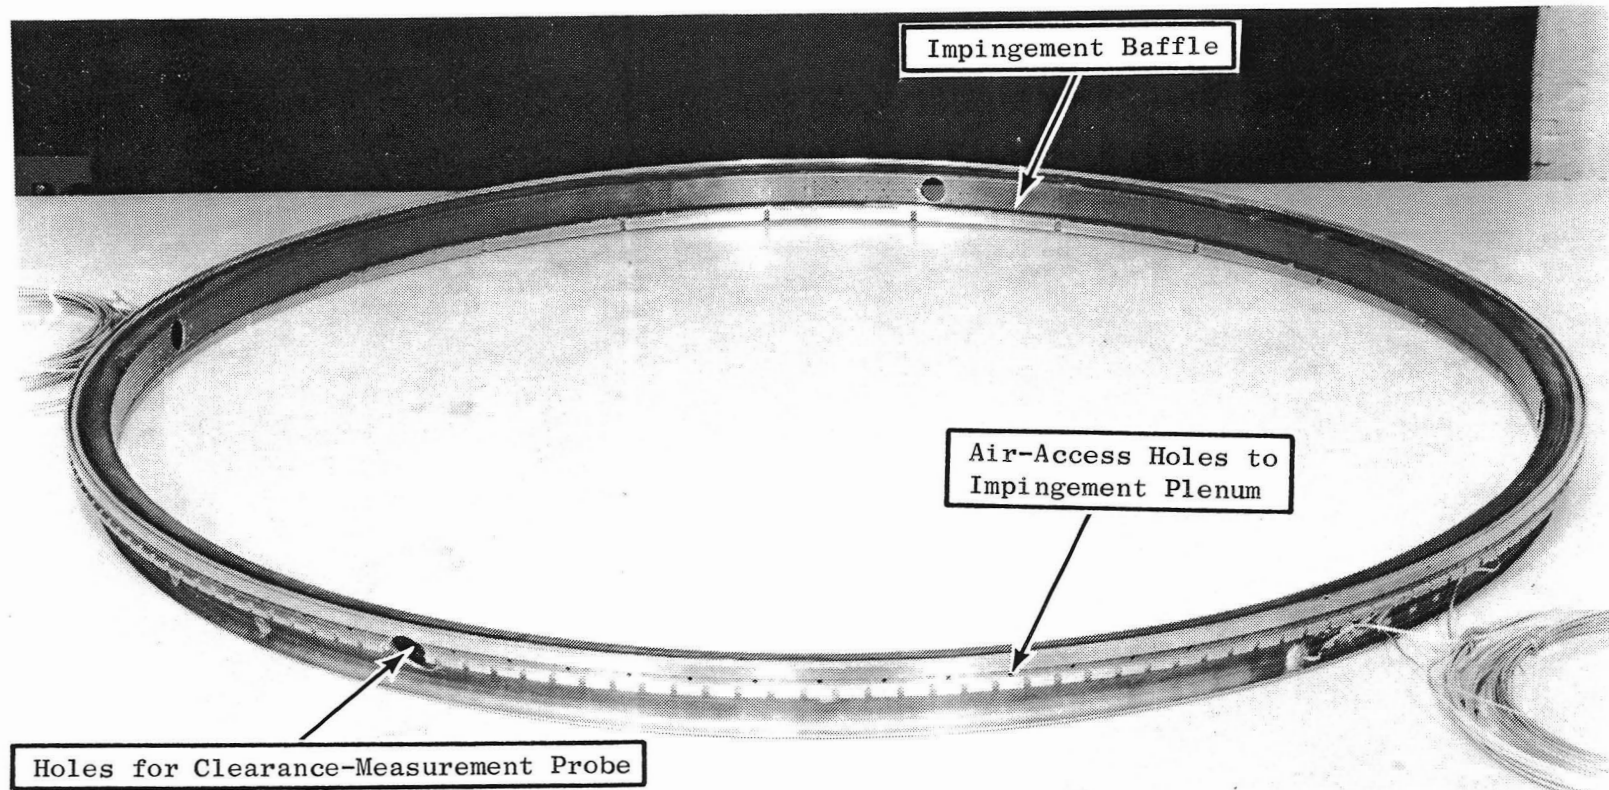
HPT Stage 1 Shroud Impingement Manifold.
